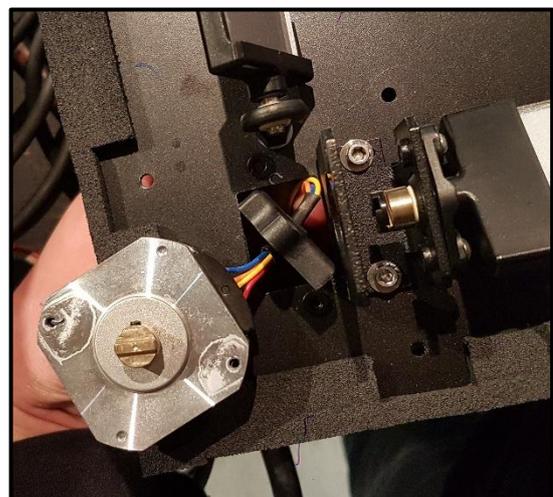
REMOVE THE MOTOR COVER AND THE WIRE GLAND
